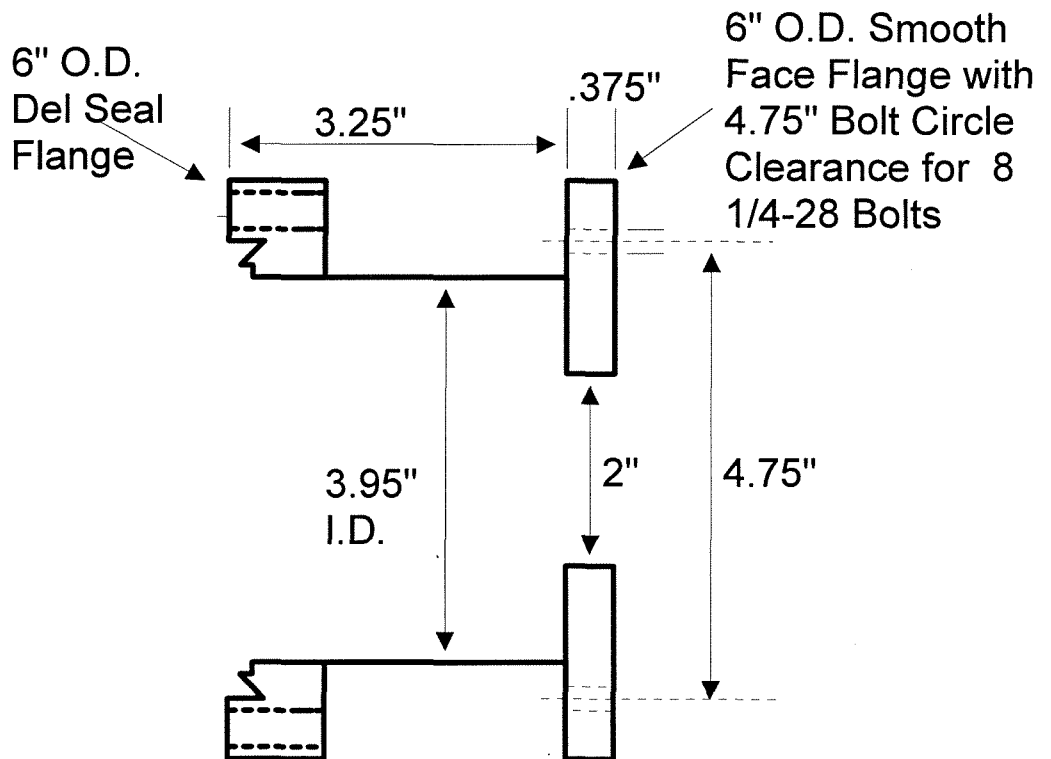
Schematic diagram of stainless steel quad constructed for mounting quadrupole mass analyzer to existing vacuum assembly.
